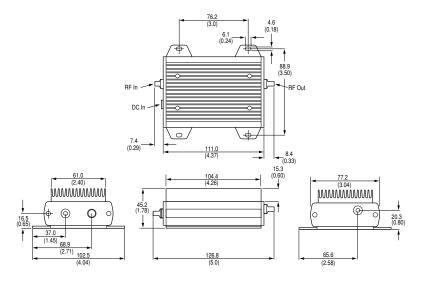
Agilent 87415A outline drawing. Dimensions in millimeters and (inches).
